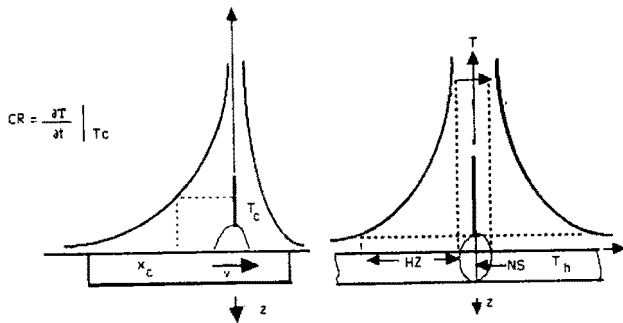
Definition of the welding output NS, HZ, CR
